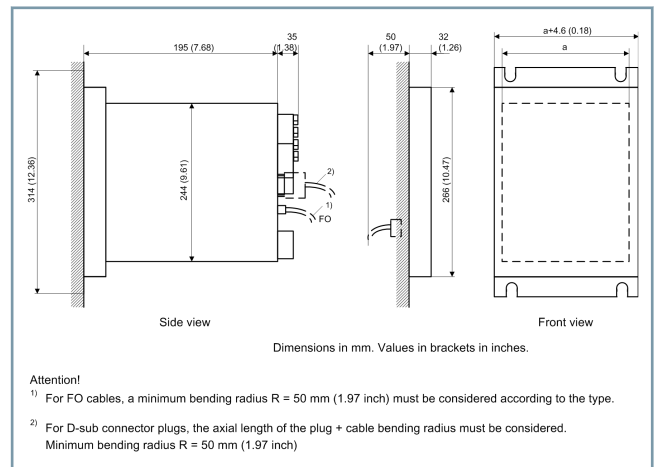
/5 Surface Mounting Device with Detached On-site Operation Panel; Dimensions in the Side and Front Views
